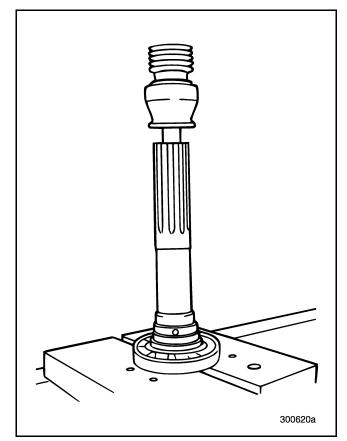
Pressing Bearing Off Main Drive Pinion Shaft
